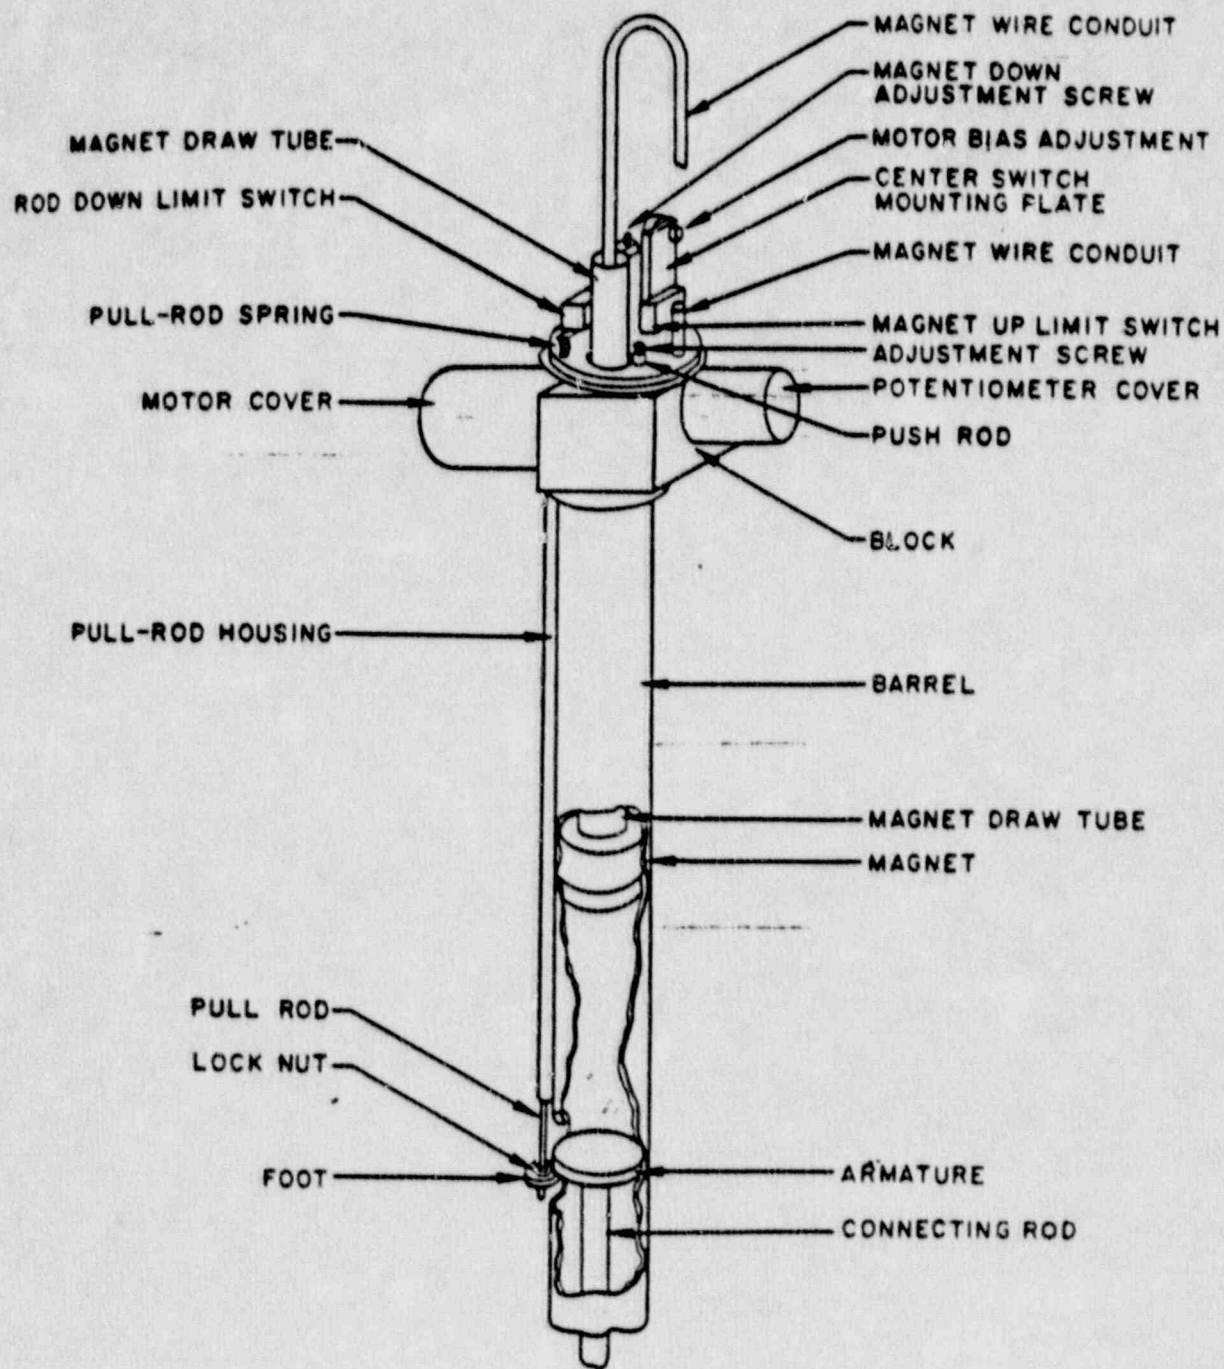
Rod drive mechanism, showing components and adjustment locations
